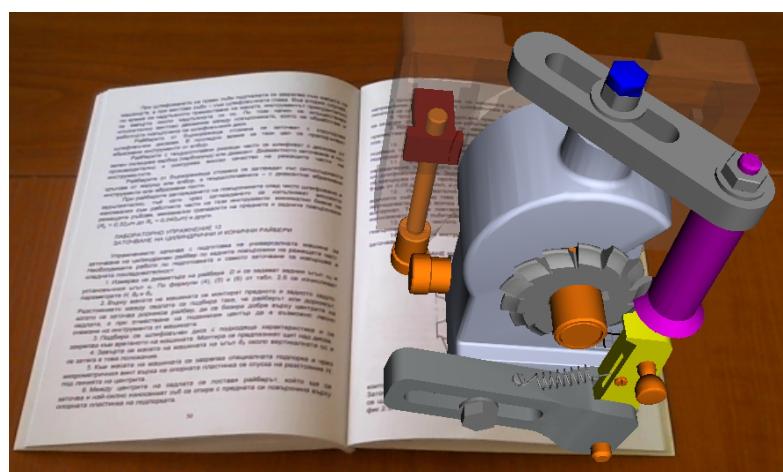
Gear Cutter holding device for tool&cutter grinding machine
